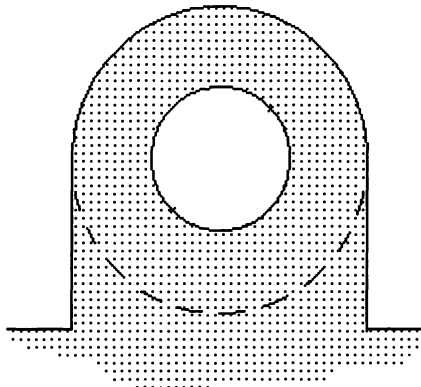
Partly cylindrical bearing attached to a large plate, with phantom surface continuing the cylinder.
